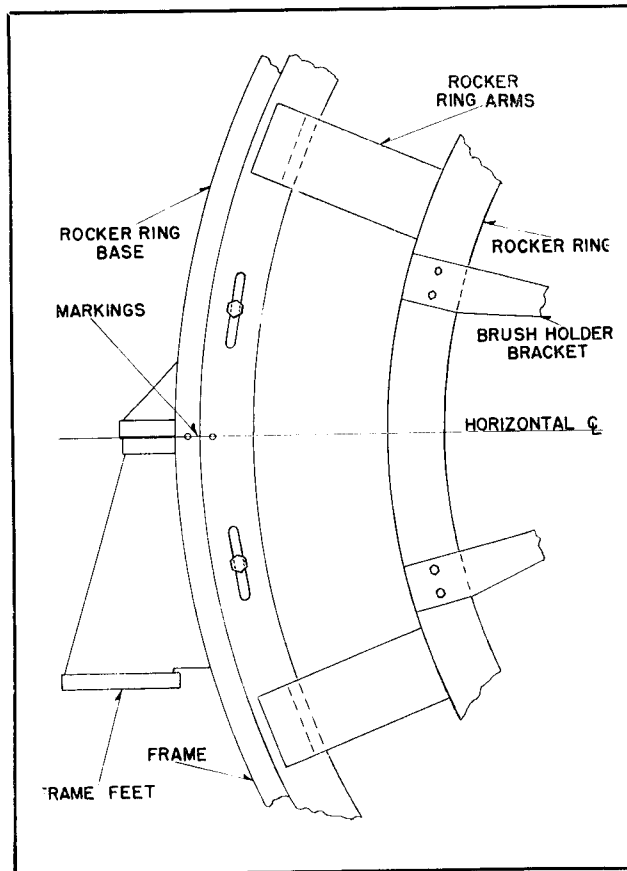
Locating Brush Position by Rocker-Ring Base and Frame Markings on Large Reversing Type D-C Mill Motors
